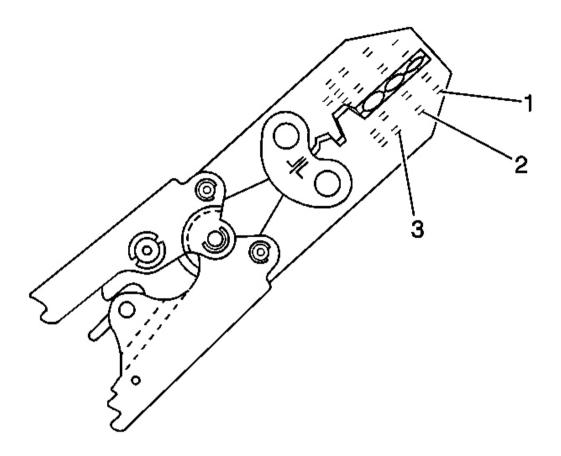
Identifying Splice Crimp Tool Nests Courtesy of GENERAL MOTORS CORP.
